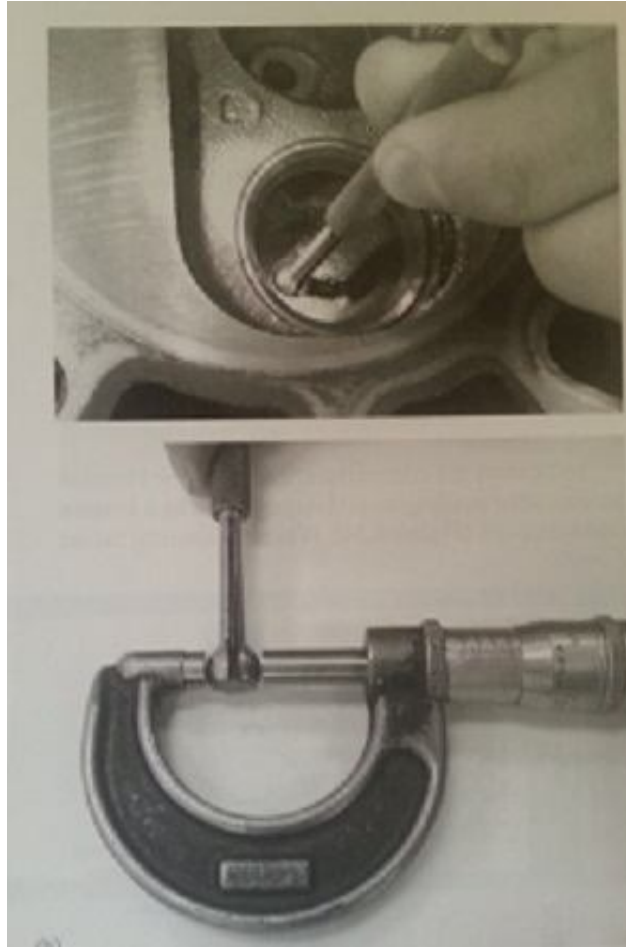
Reading the small hole gauge size after setting it and taking measurement
